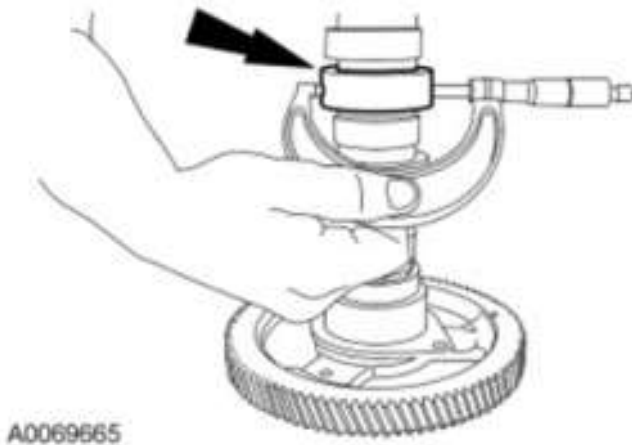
Measuring Camshaft Bearing Journal Diameter
